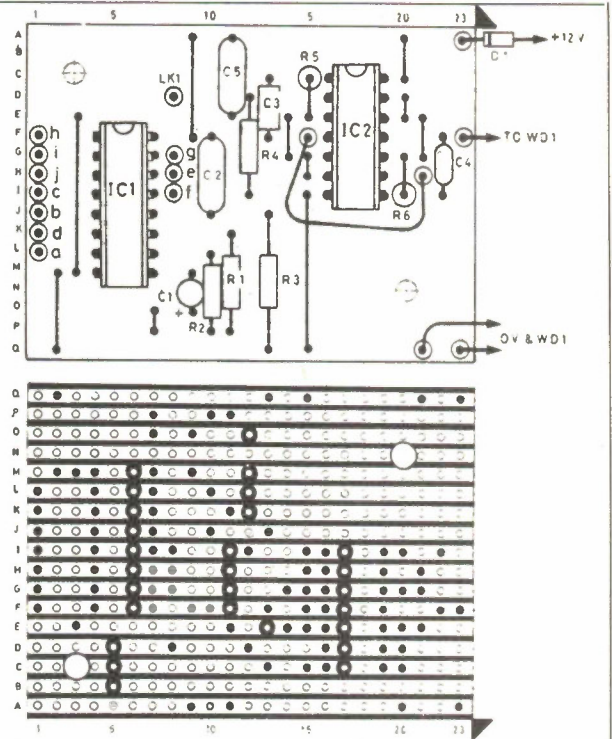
Component layout and details of breaks to be made in the underside copper strips of the stripboard version
